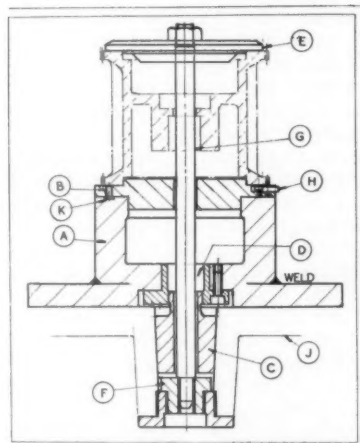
Fabricated fixture for cutting the teeth illustrating the removable insert which position the teeth in the second operation. A, fabricated steel base. B, locating spigot. C, table spigot. D, bush in base locating on table spigot. E, clamping plate. F, lower bushes for stud. G, stud. H, tooth locating detail. J, machine table. K, turned groove prevents damage to top face of fixture
